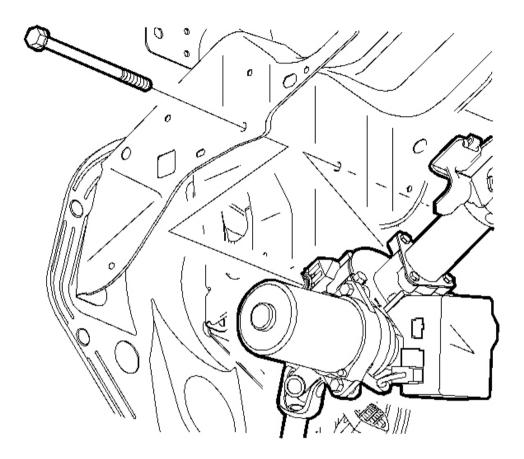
Lower Column & Mounting Bolt Courtesy of GENERAL MOTORS CORP.
